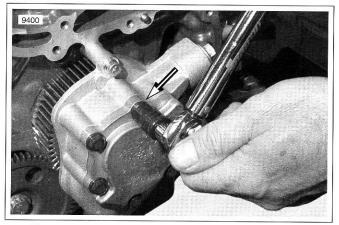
Oil Pump Cover @ 9.7 Nm (85 in-lbs)
